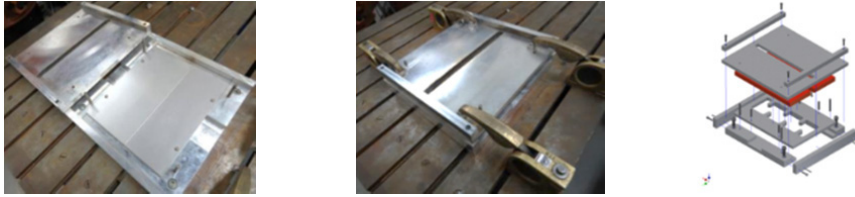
Clamping device for the laser beam welding of different dissimilar lap welds of steel and aluminum alloys.
